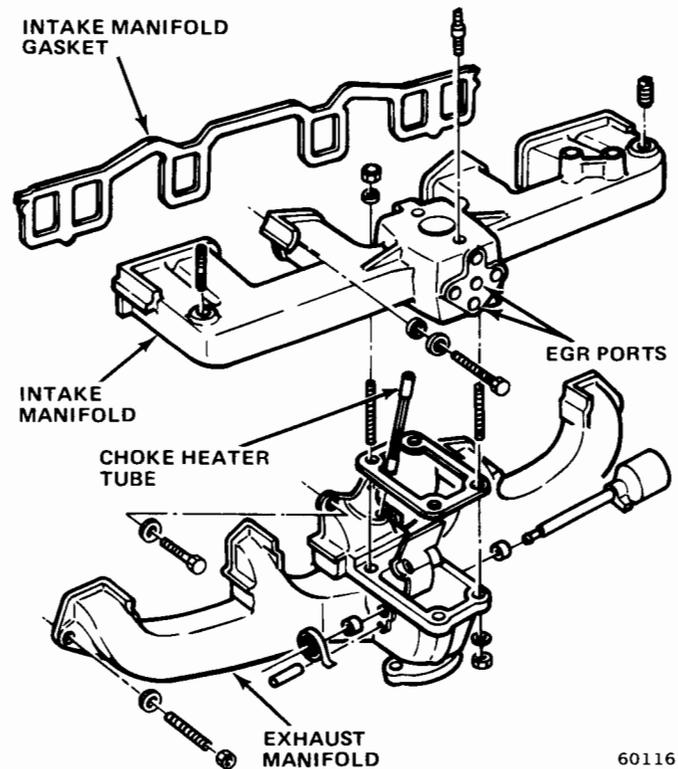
A-12 Intake and Exhaust Manifold Assembly
